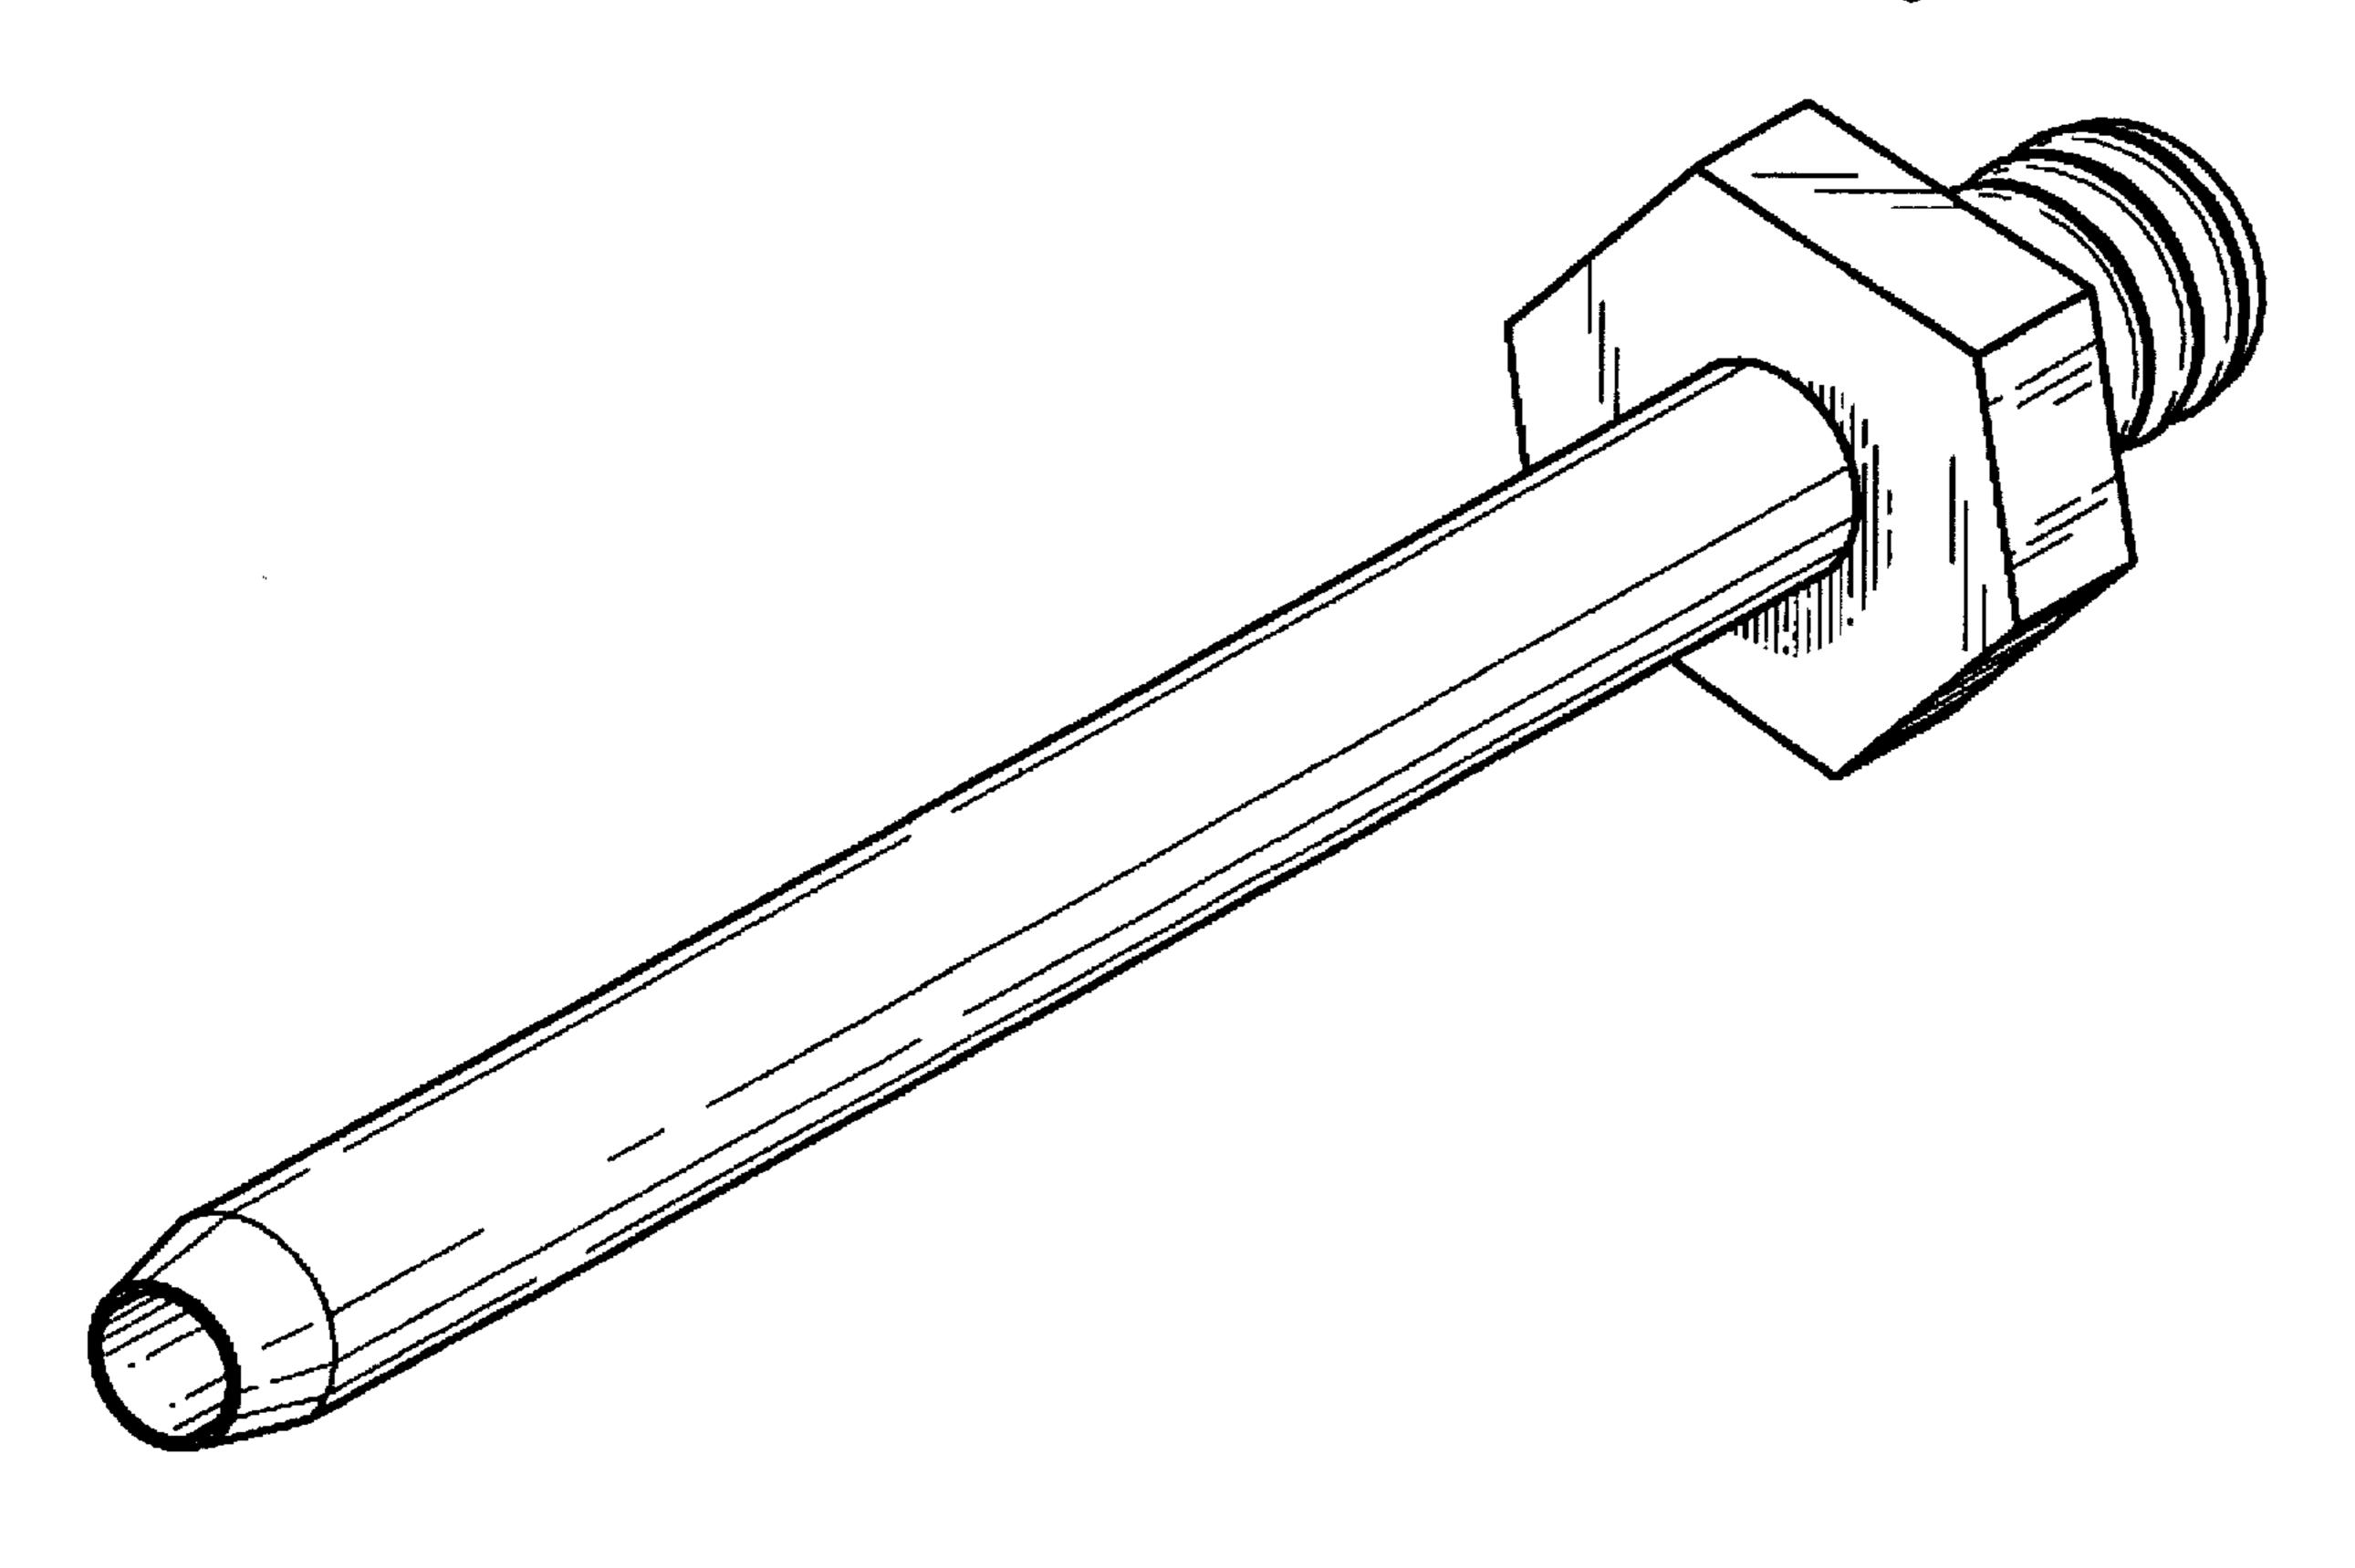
is a side plan view of the welding-wire guide for arc coating devices of the present invention;
